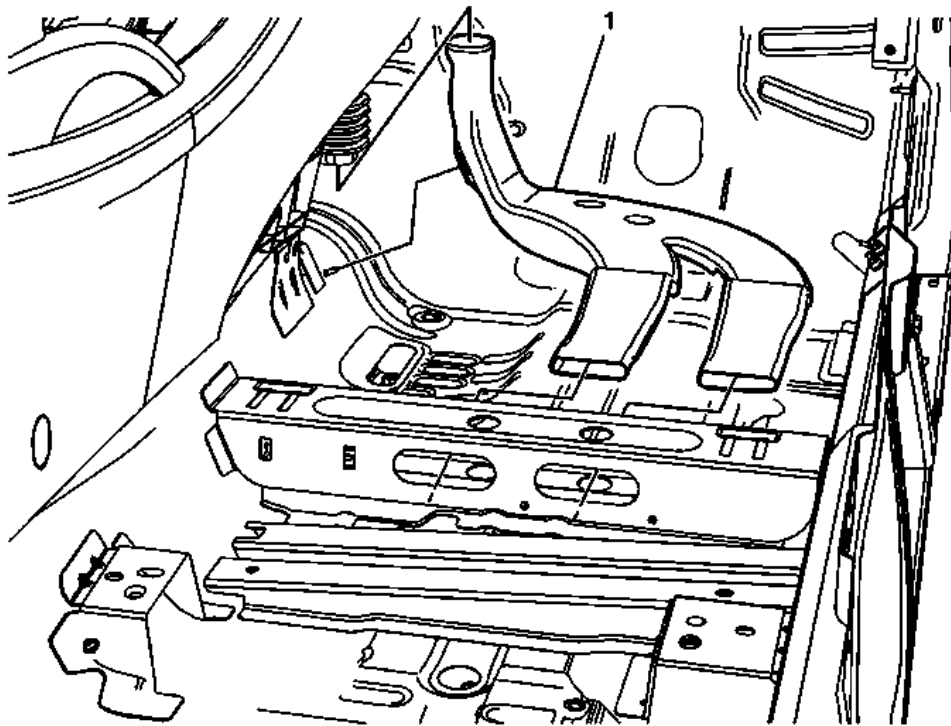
Floor Rear Air Outlet Duct - Right Side
